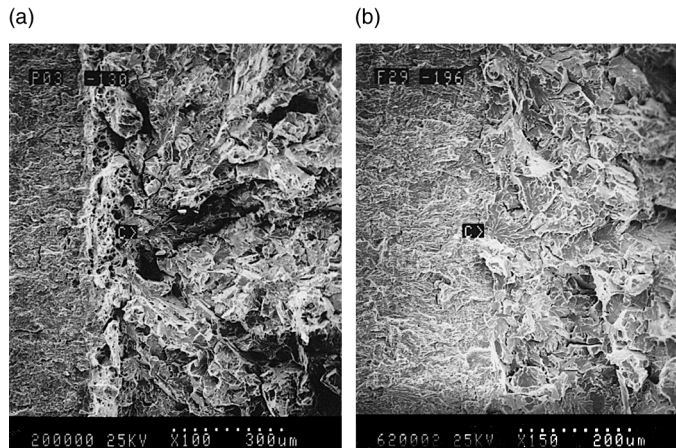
Typical fracture surface of specimens tested at (a) -130°C (b) -196°C .
